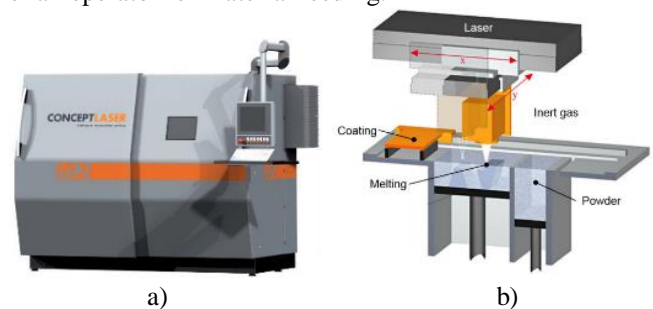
External view (a) and operation principle (b) of Concept Laser M2 Cusing 3D printer [30], [31].
